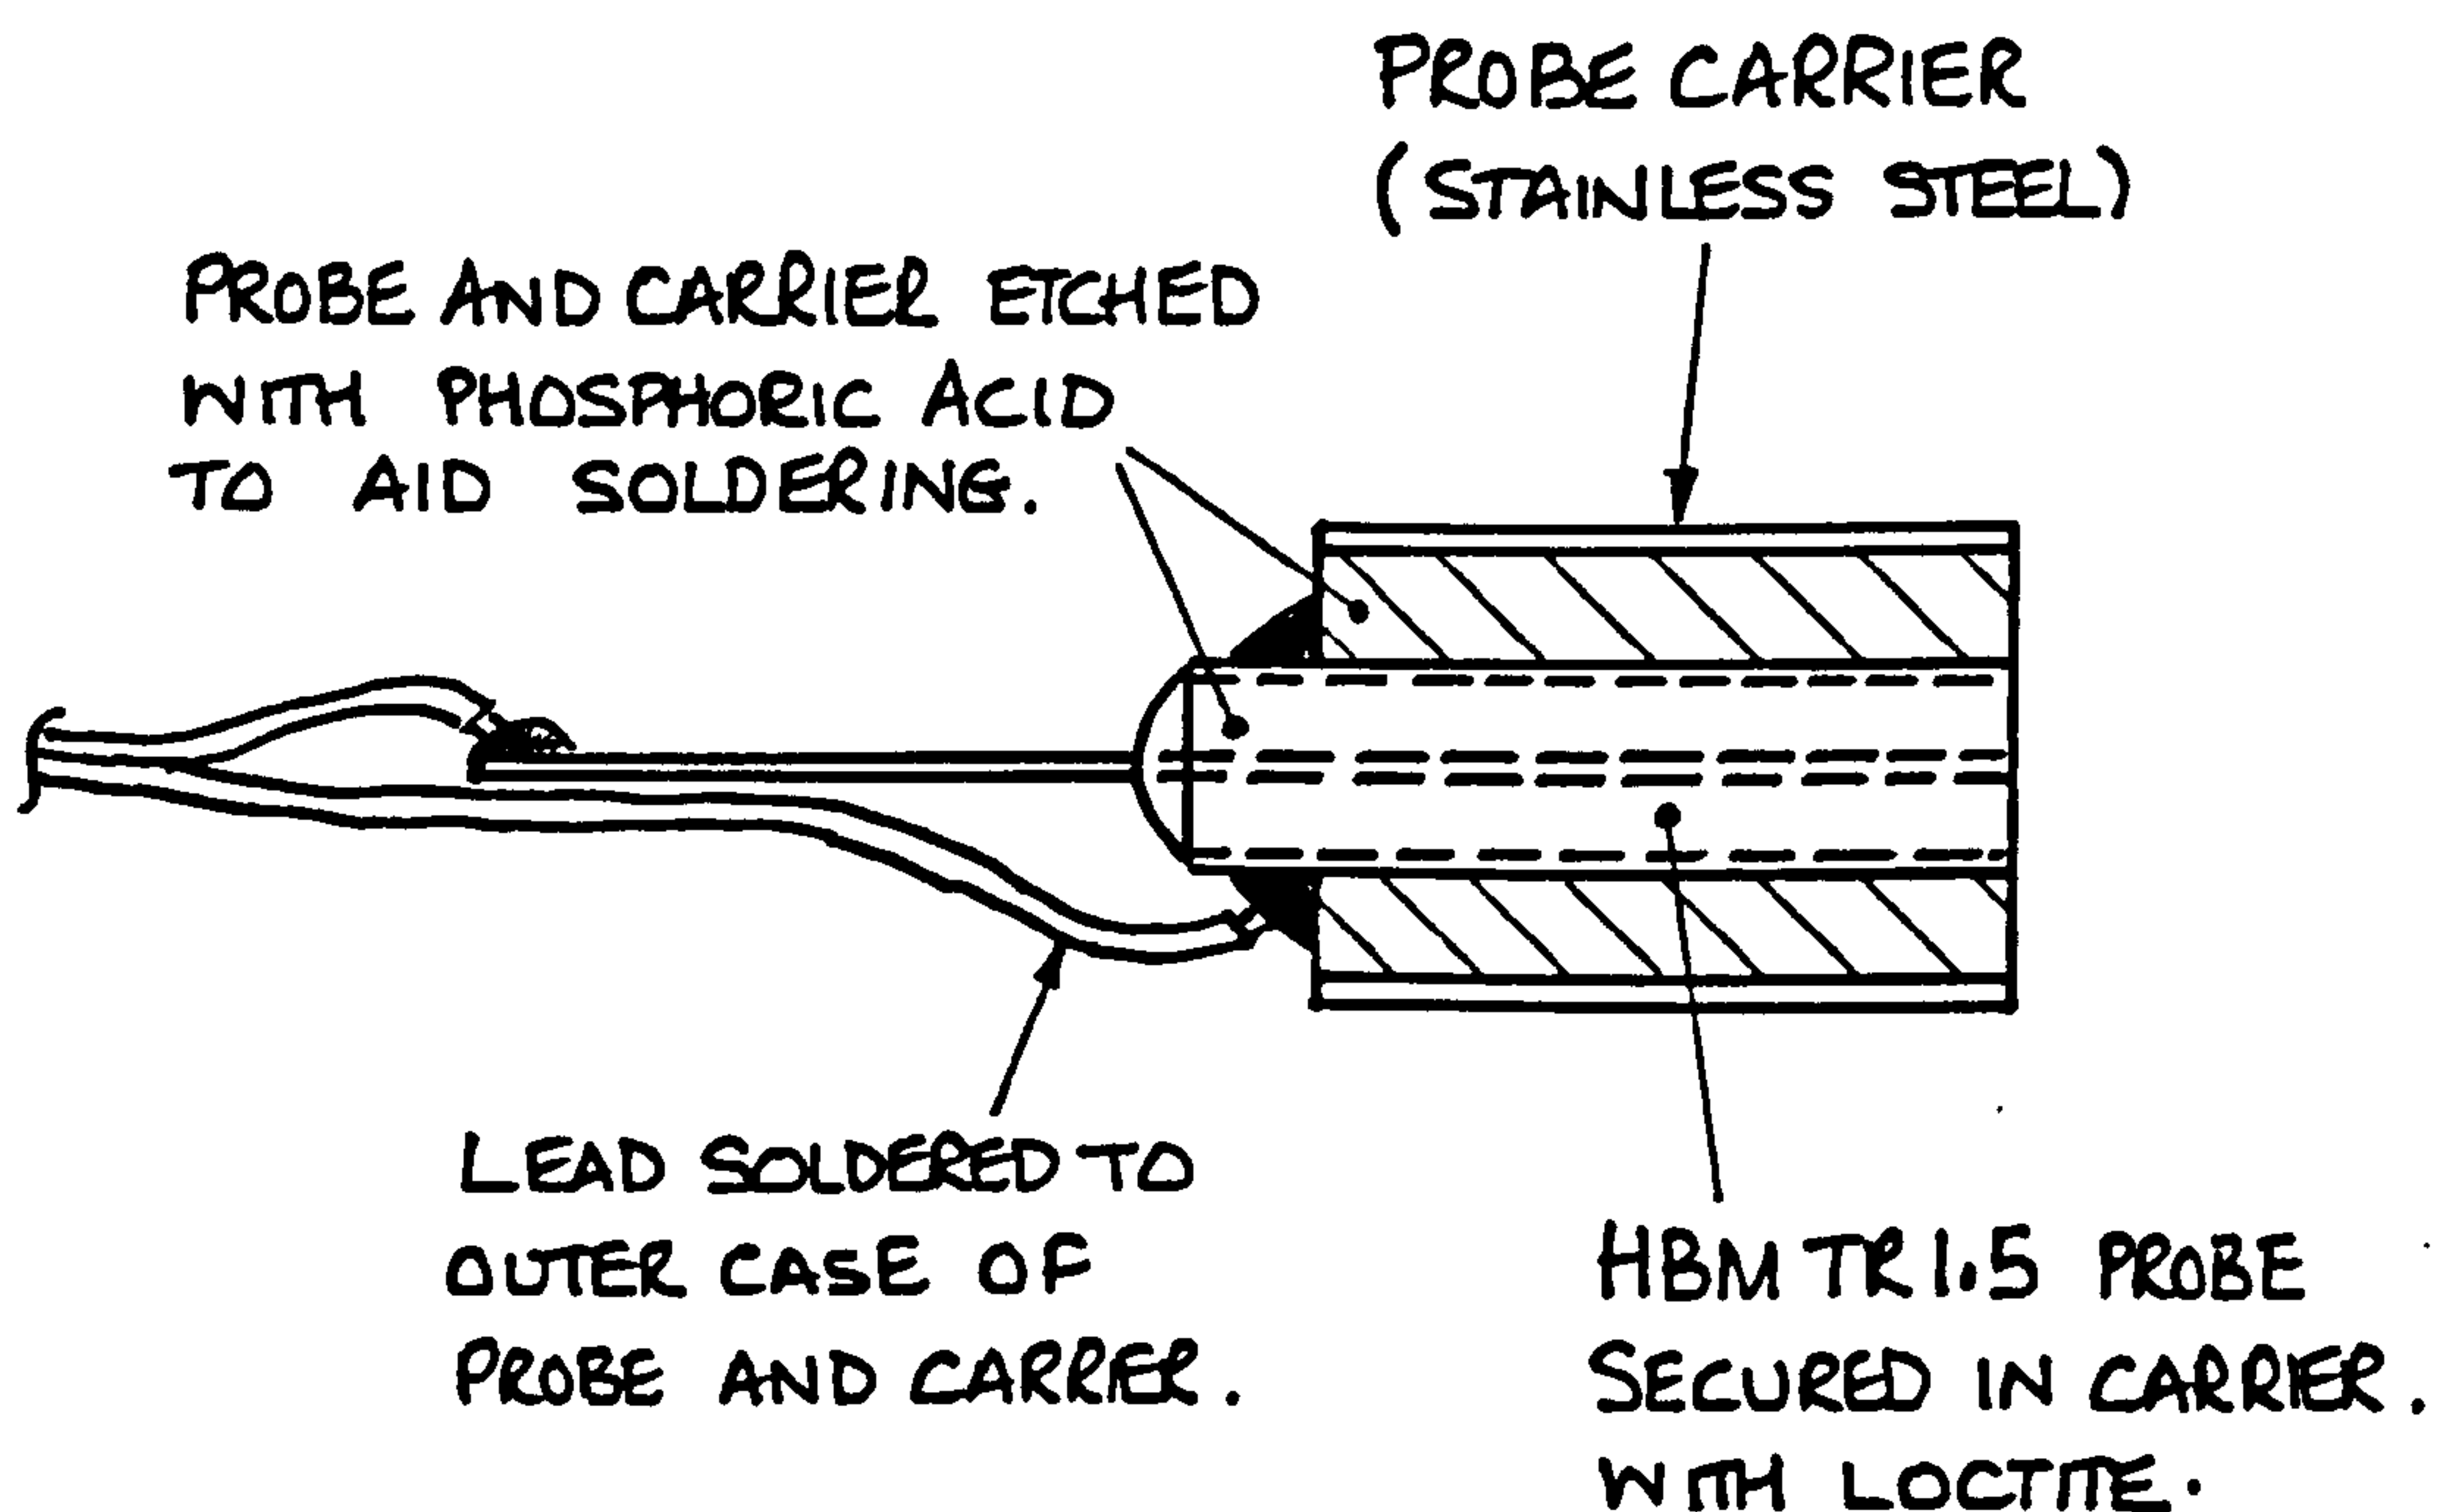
HBM PROBE FIXING TECHNIQUE
